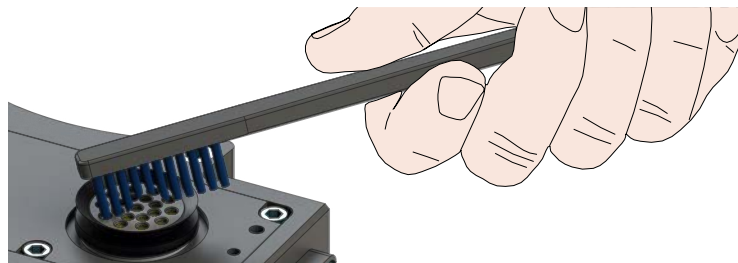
Inspect Master and Tool Pin Blocks
